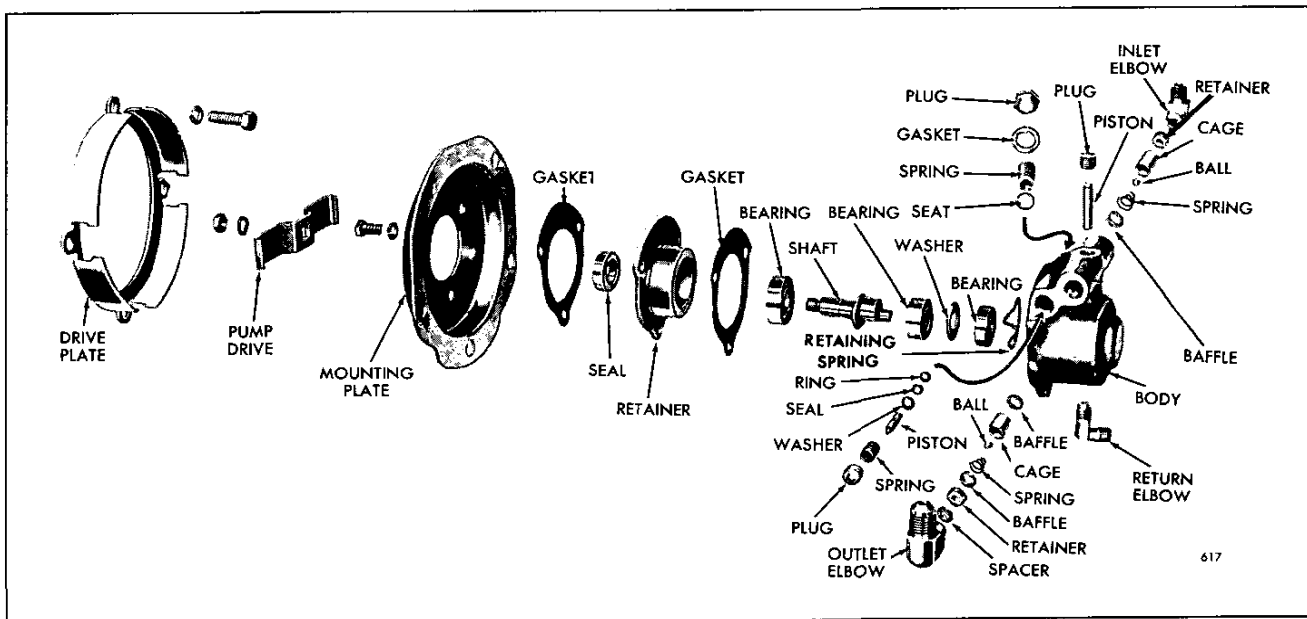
Direct Engine-Driven Charging Pump Details and Relative Location of Parts
